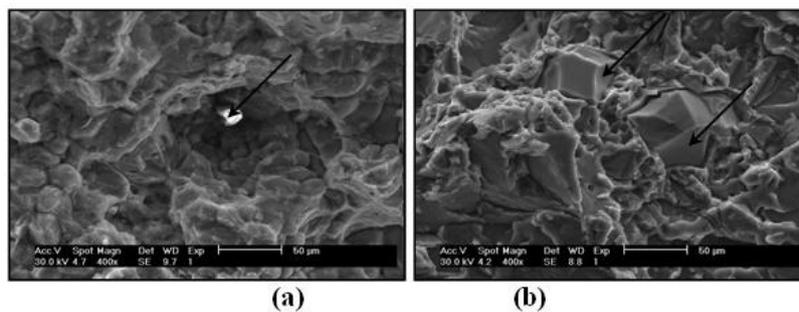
SEM fracture surface photographs of Al-20%SiC MMC at 400X. (a) Tensile (b) Impact.
